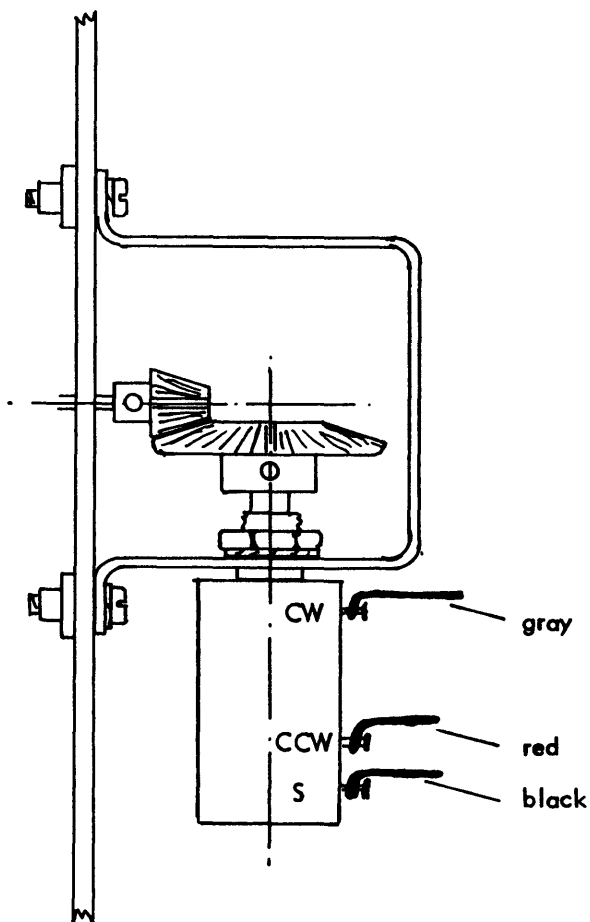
LOAD Coil Servo Potentiometer Assembly
